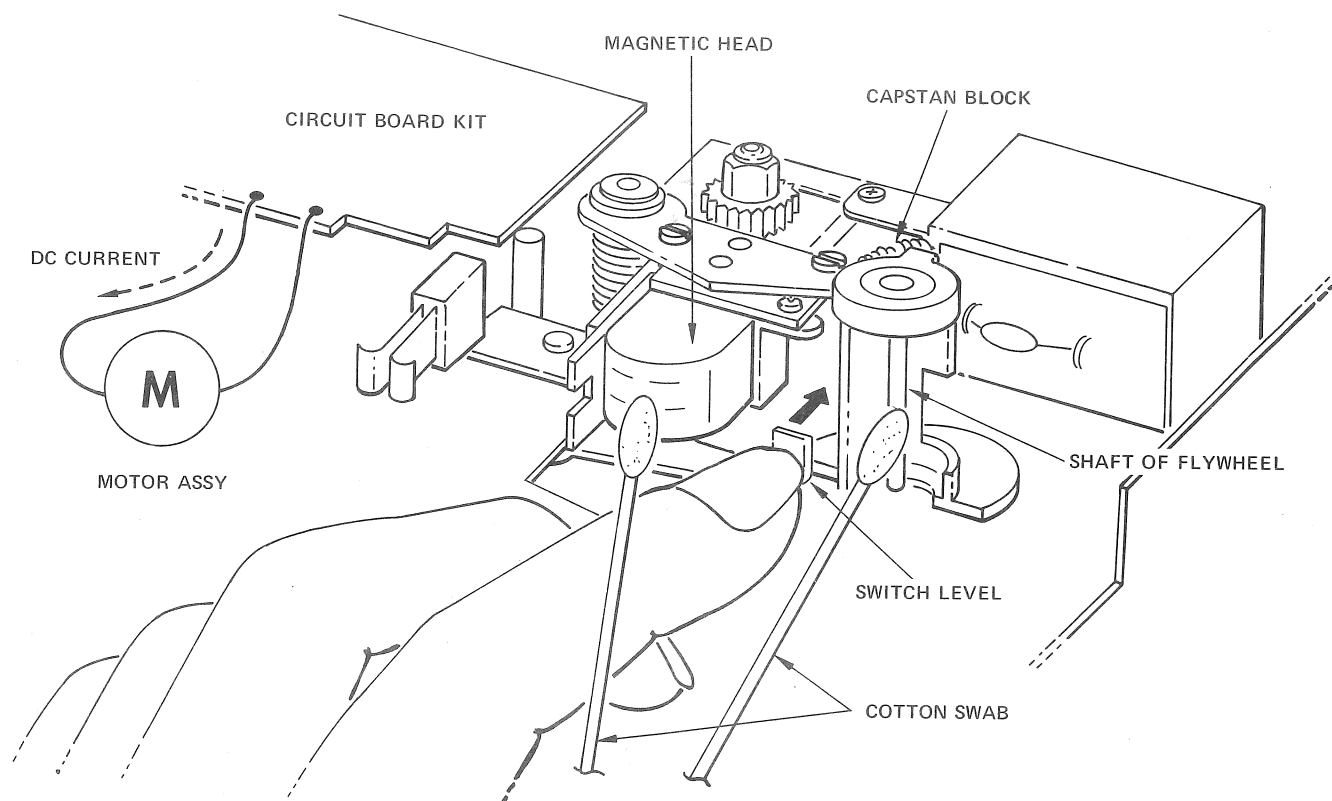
TAPE HEAD AND FLYWHEEL SHAFT CLEANING DETAIL
